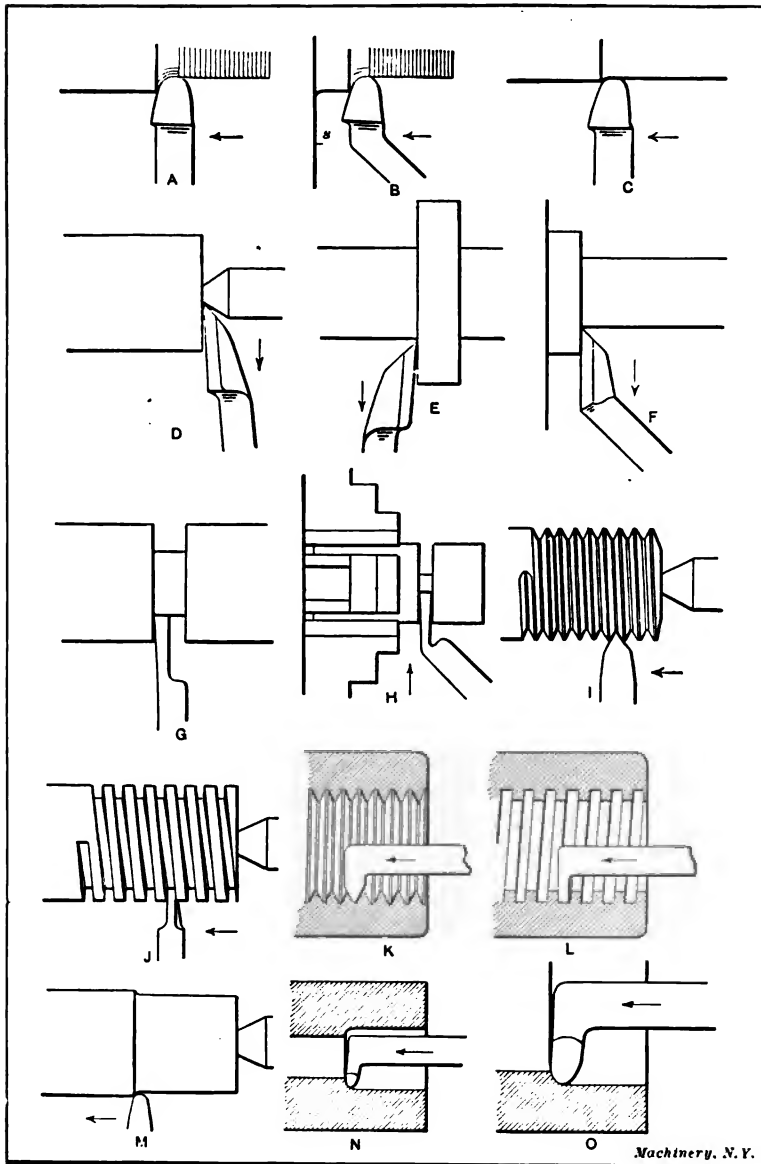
Views illustrating Use of Various Types of Lathe Tools
